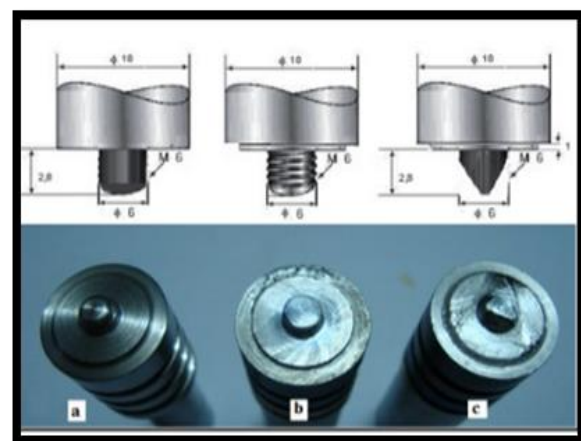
pin shapes geometry: a) Cylindrical pin, b) Cylindrical Threaded pin, c) Triangle pin [41].
